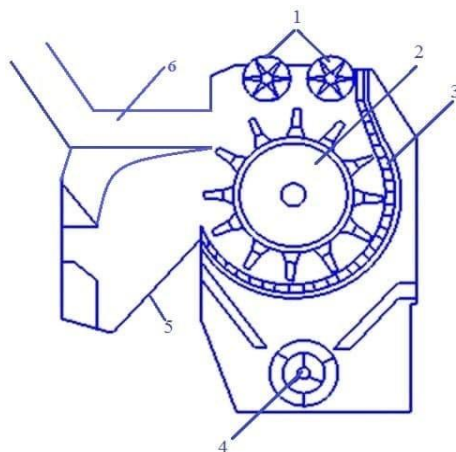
An improved version of the PD type supplier equipment 1.Provider status; 2.Pile drum; 3.Mesh surface (surface); 4- Waste conveyor; 5-Nov; 6-Air supply pipe.
